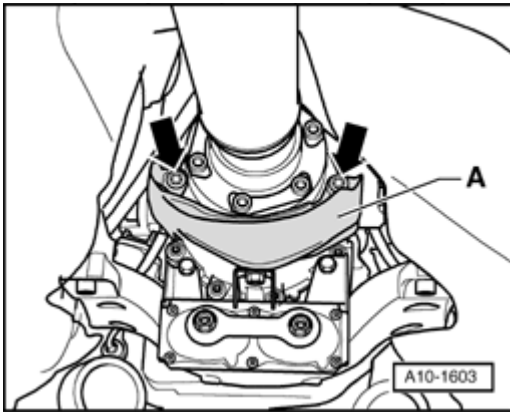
Removing/Installing Heat Shield For Driveshaft
